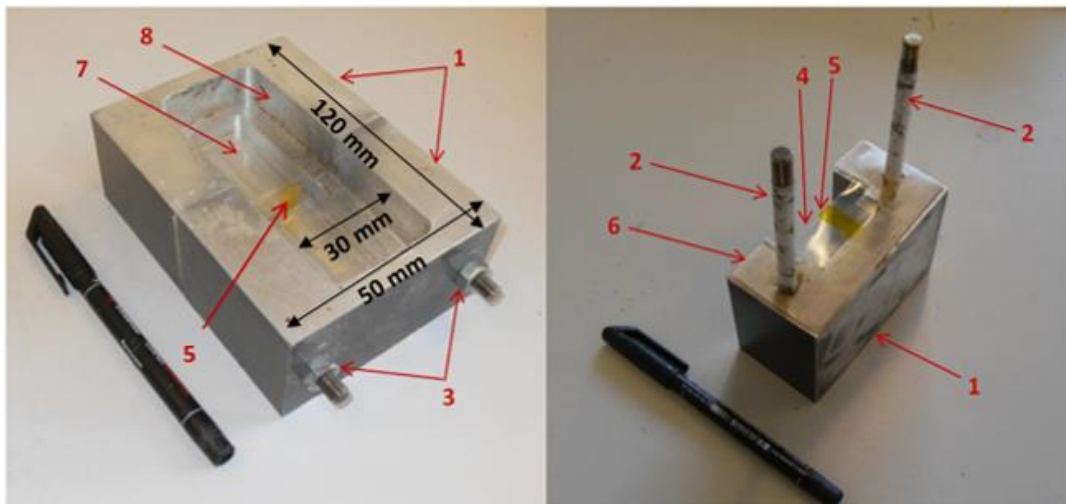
Instrumented mold (1) dedicated to the processing of the specimens containing the TS-TP interphases: (2) two threaded rods; (3) two bolts; (4) PEI film; (5) PI insert; (6) two Teflon films; (7) lower part; (8) upper part.
